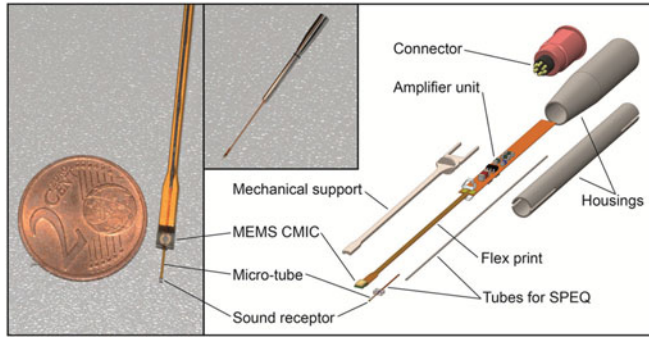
Photographs of a zoomed-in view of the sensor head and completely assembled ICAR (left and middle). Enlarged assembly drawing with components (right).
